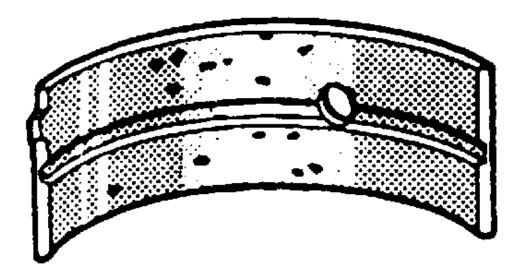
View Of Crankshaft Bearings Courtesy of GENERAL MOTORS CORP.
